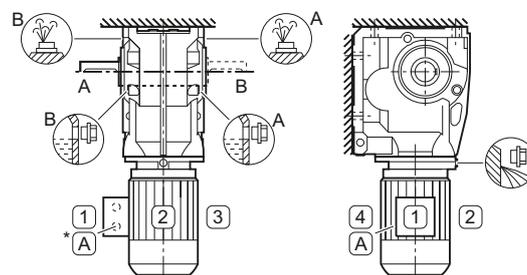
Mounting position for bevel gearbox BAD shaft-mounted design, sizes 39 - 49
